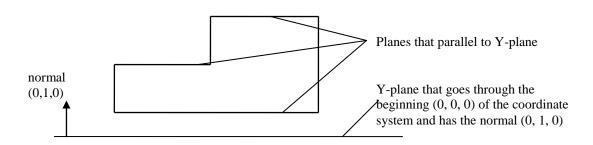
Cross section by Z-plane through a part with stepped top machining
